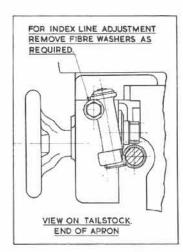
Thread Dial Indicator Mounting for Super 7 Lathe
